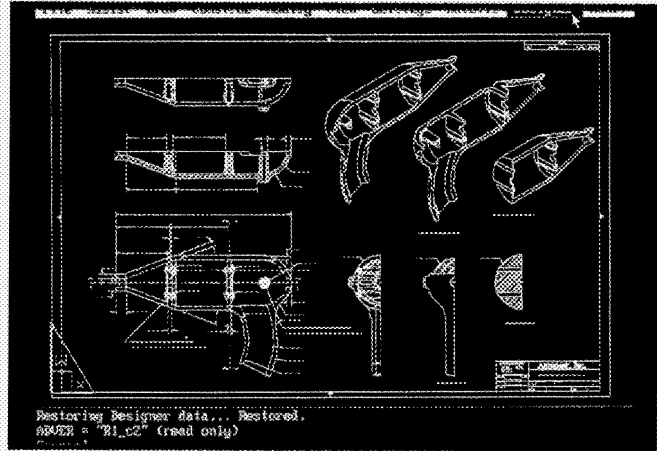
FIGURE B Detail Drawing of Dremel Body with Multiple Dimensions and Sections
